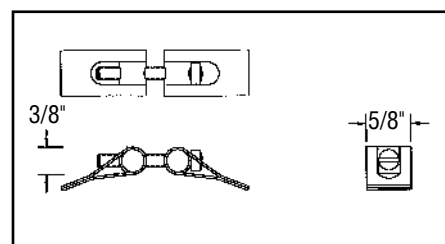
Standard Profile — Barrel Nut Assembly Welded to Sheath with 10-32 Screw.
